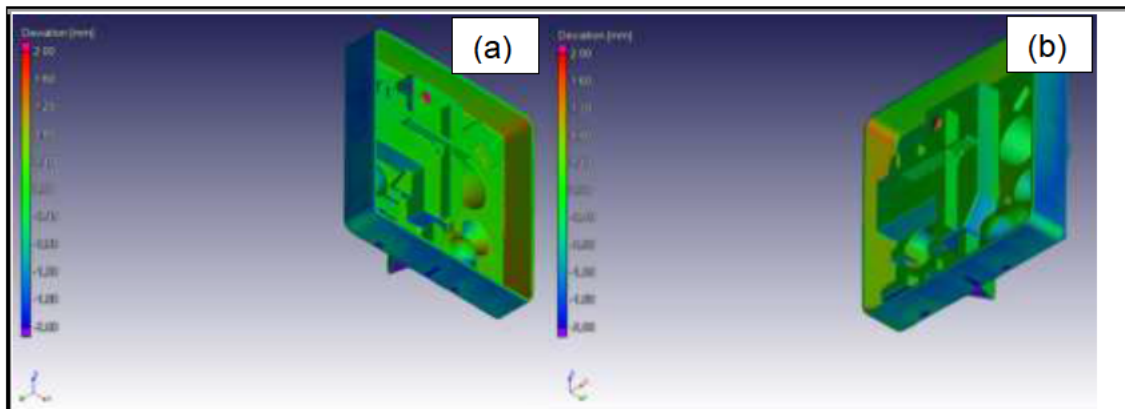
3D images: (a) bottom-left-front and (b) bottom-front-right
